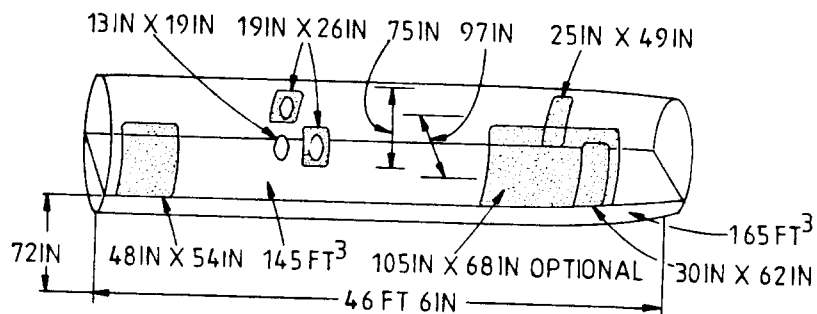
Fuselage and Cargo Hold Dimensions for Turbopropeller Driven Transports
